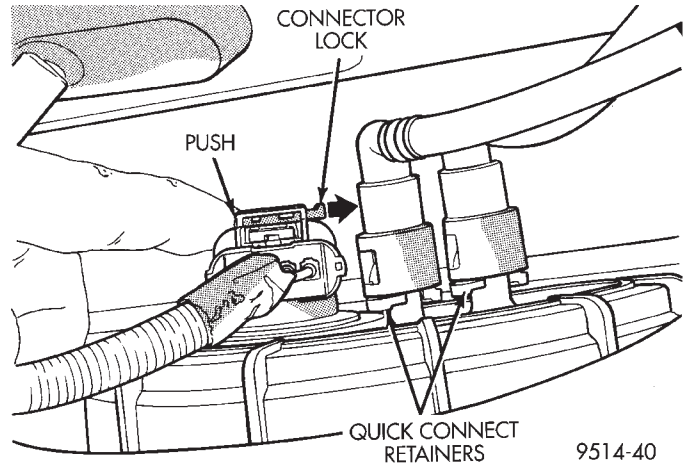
Fuel Line Retainers and Pump Connector Lock
